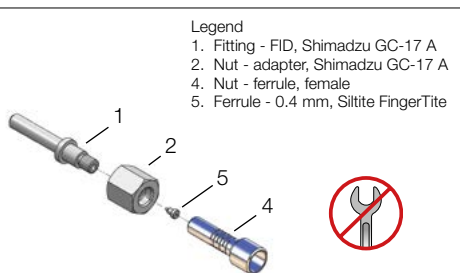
Exploded diagram of the SilTite FingerTite assembly.
